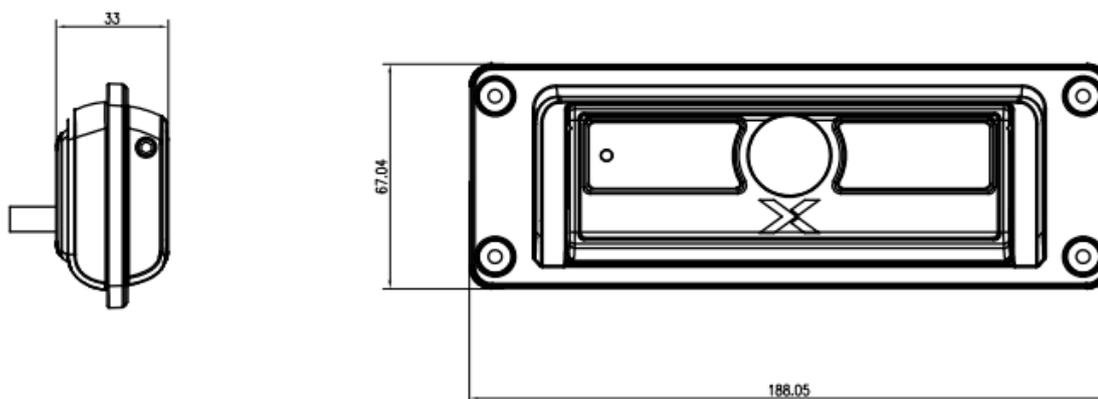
Dimensions of the Passenger Counter with the Embedded Bracket (Unit: mm)
